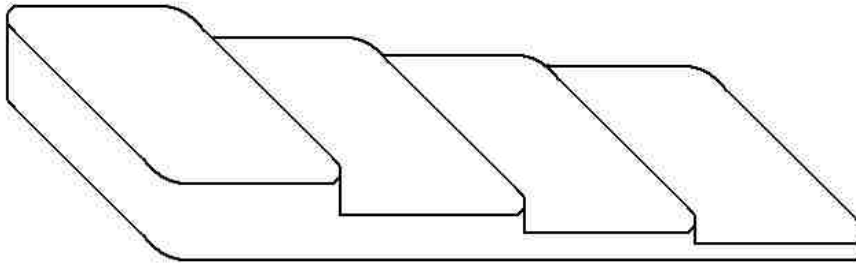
AJ62 permanent mould step casting [13,14].
